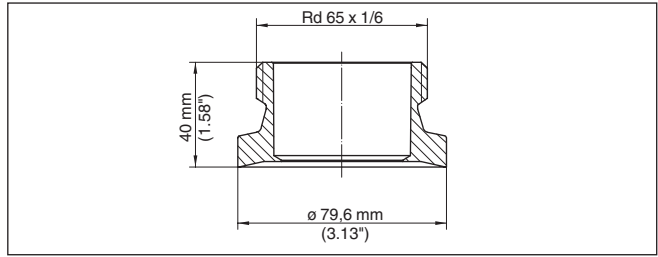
Dimensions of welded socket, hygienic fitting F40 with compression nut
